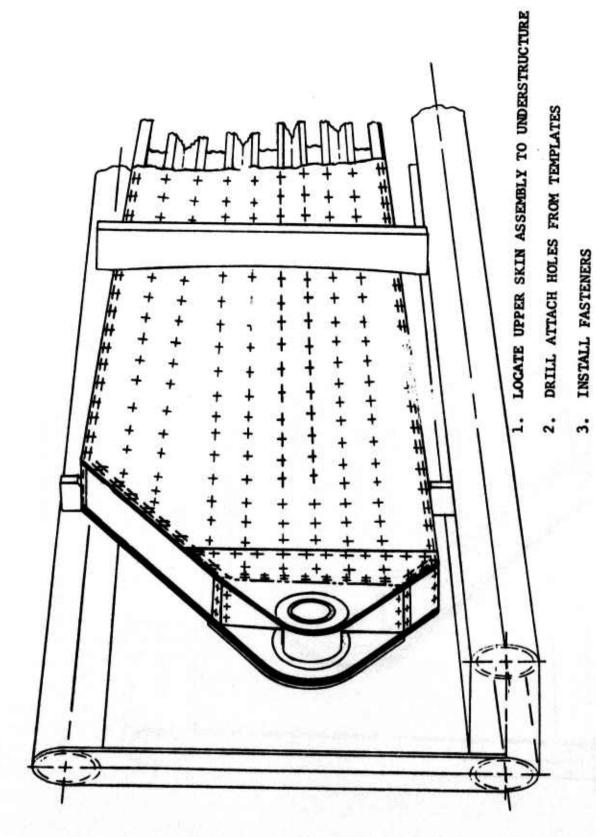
Secondary Manufacturing Final Assembly Upper Skin and Understructure
